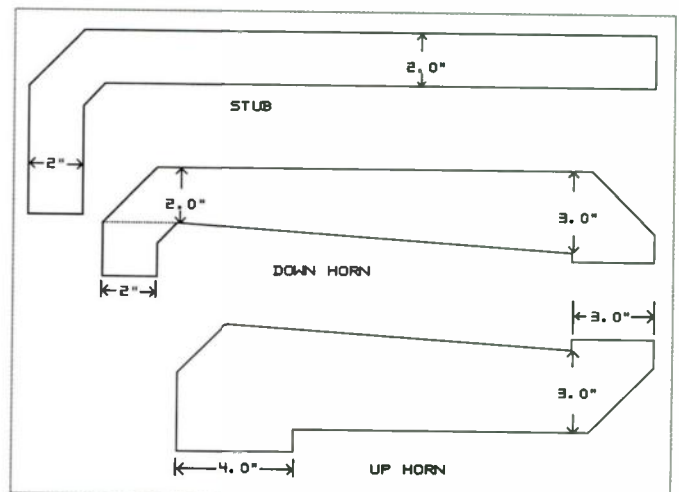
Stub and horn templates; see enclosure layout for additional dimensions.
